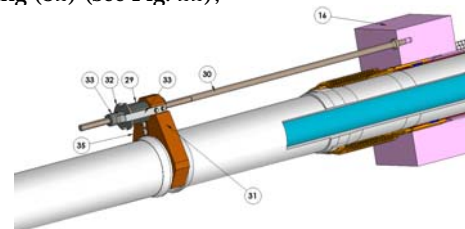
Schematic representation of counter nut locking mounting and blocking
